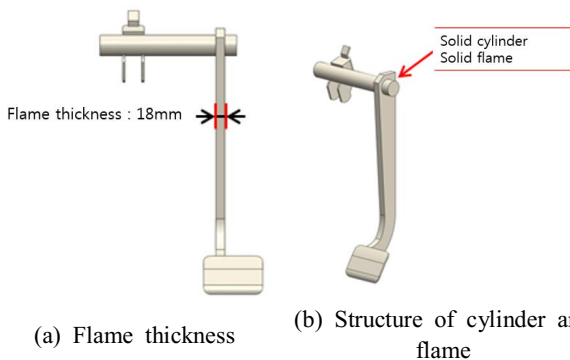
Shape of new aluminum-alloyed brake pedal for die-casting process
